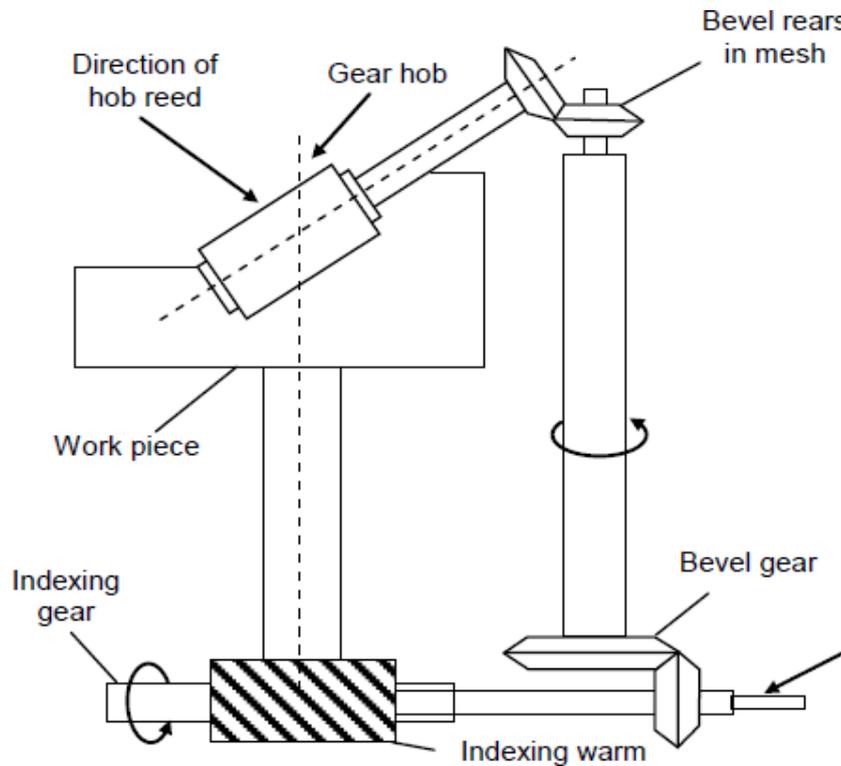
(b). Setup for Gear Hobbing Machine
